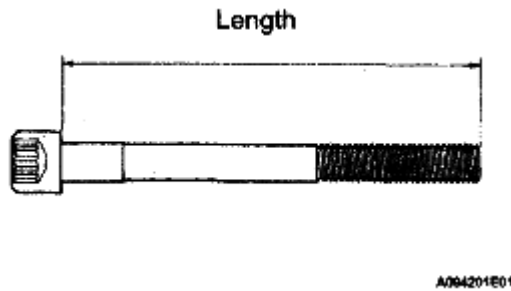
Identifying Length Of Head Bolts From Seat To End
